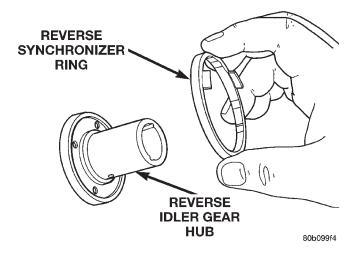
Remove Reverse Idler Gear Synchronizer Ring
